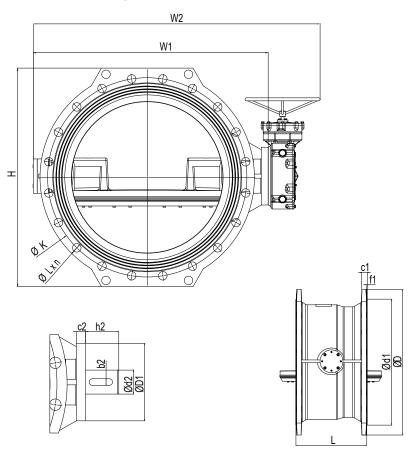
Sectional drawing PN 25 DN 700 - 1000
